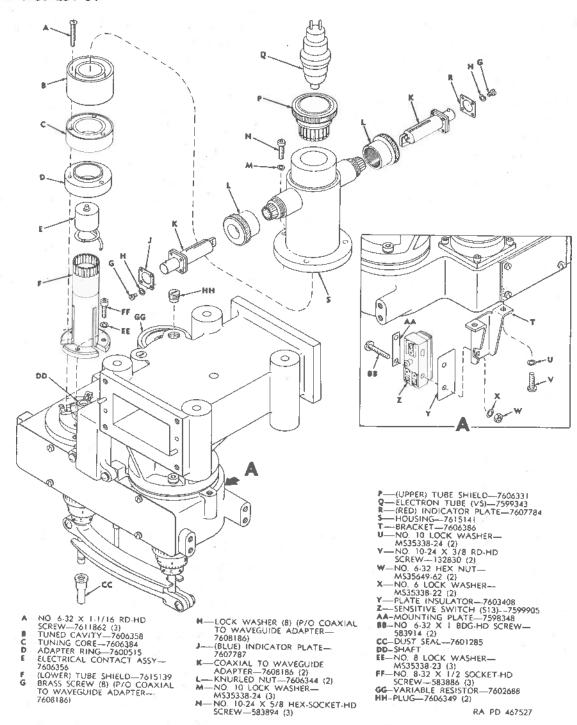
Receiver tuner assembly 7621790 -- partially exploded view No. 1.
